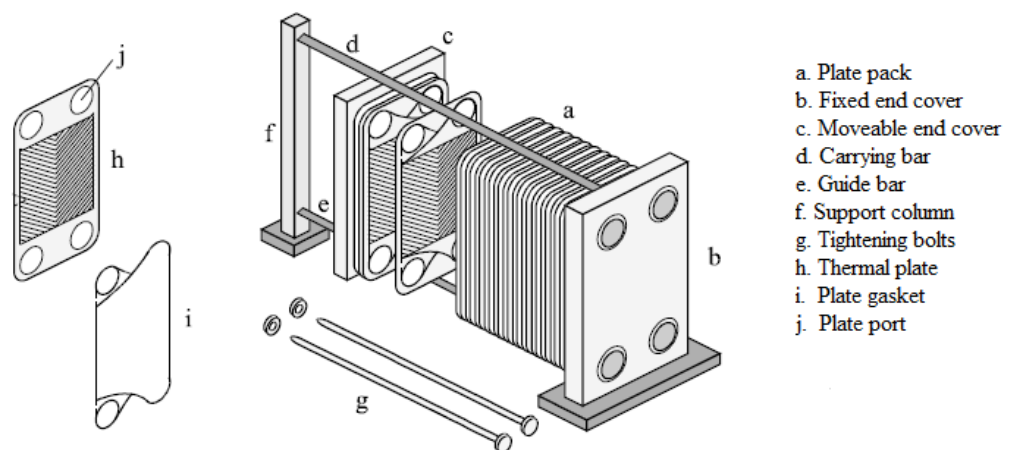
Exploded View of Gasketed Plate Heat Exchanger
